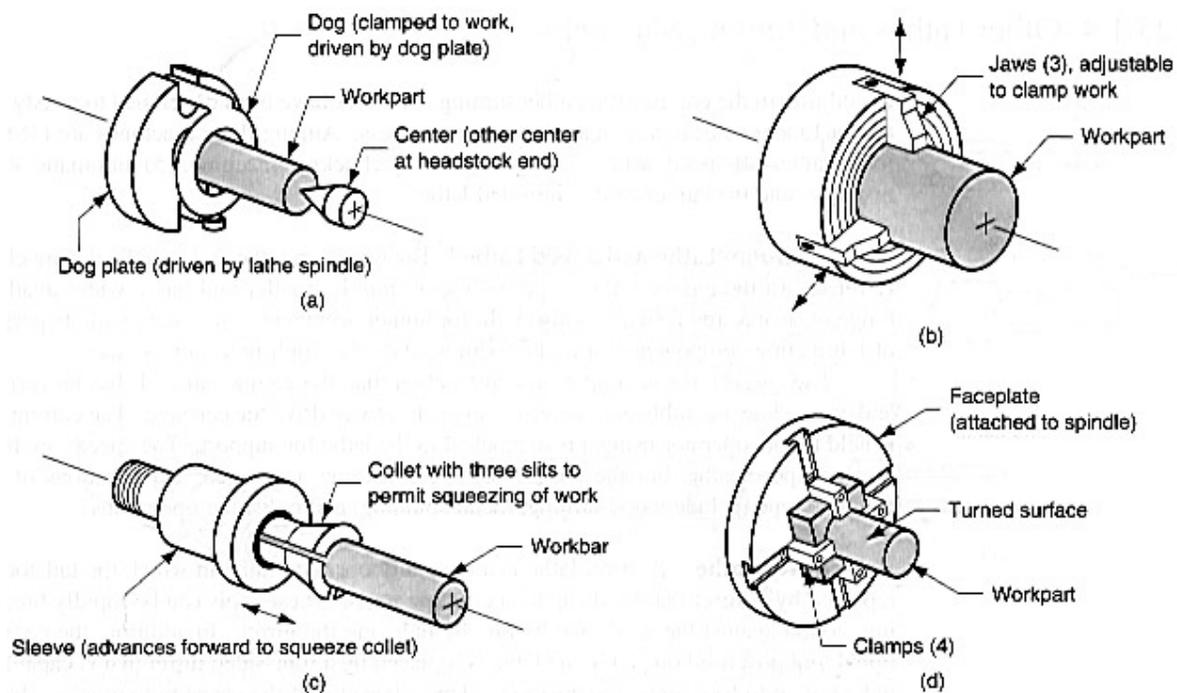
Four Work-holding methods used in lathes: (a) mounting the work between centres using a dog, (b) three-jaw chuck, (c) collet, and (d) face plate for noncylindrical work parts.
